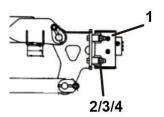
The swinging cylinder is connected with the upper connecting piece
